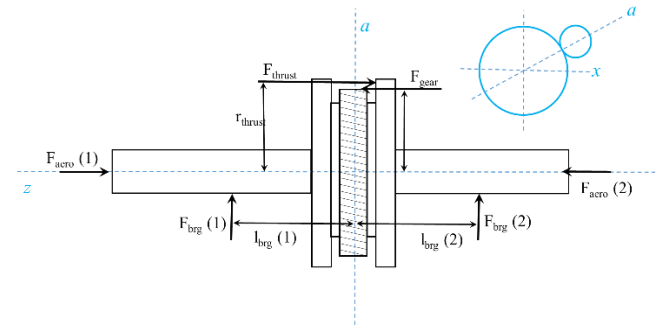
Free Body Diagram of Single Helical Gear Pinion with Thrust Collars
